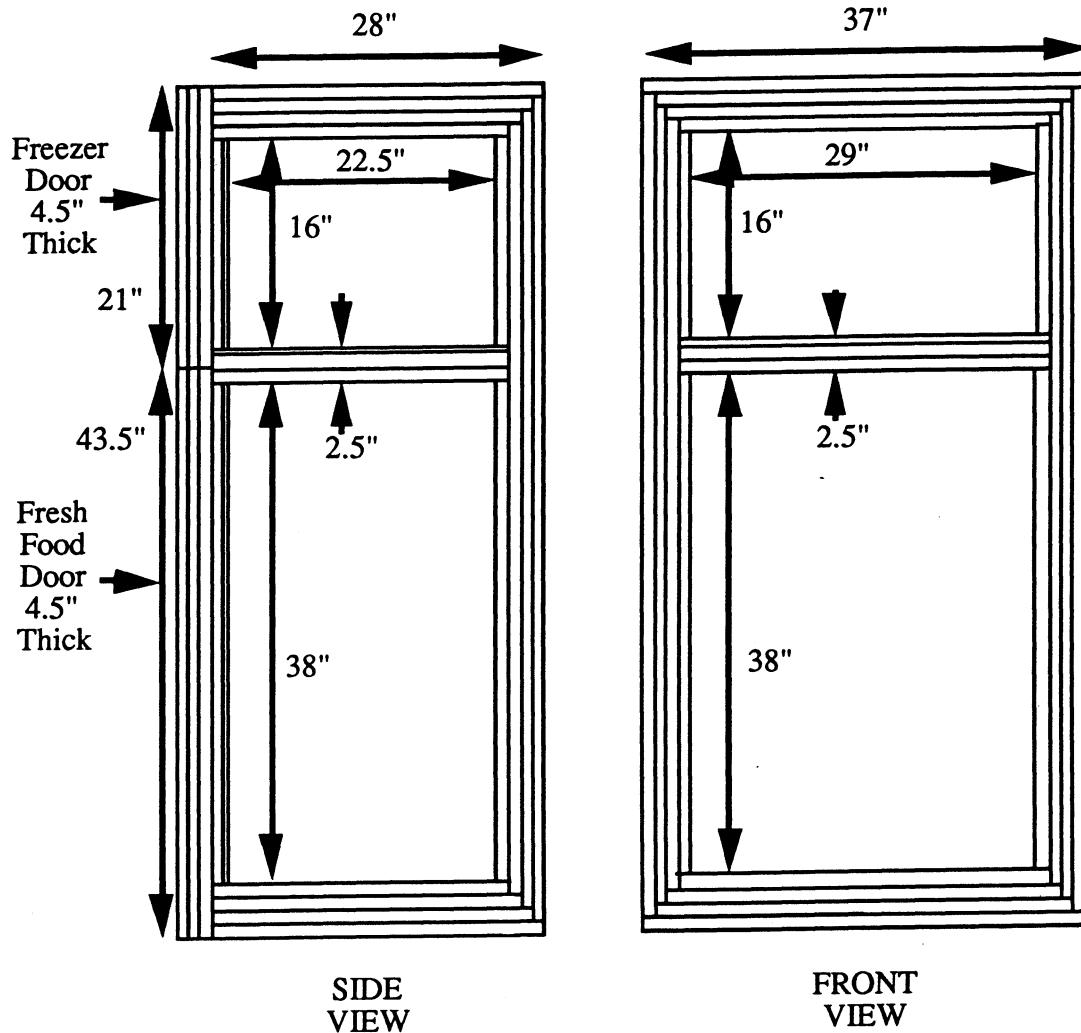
Layout and dimensions of the insulated box used for the experiment (all dimensions in inches)
